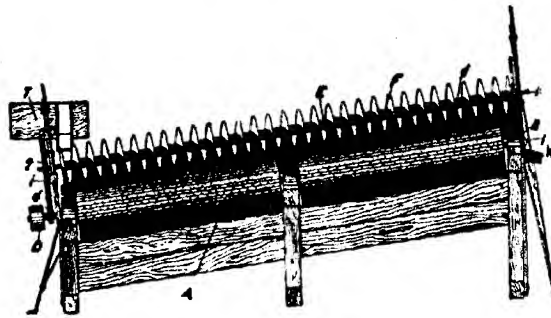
Longitudinal view of the machine with cover removed, showing arrangement of drum and feed screw.
